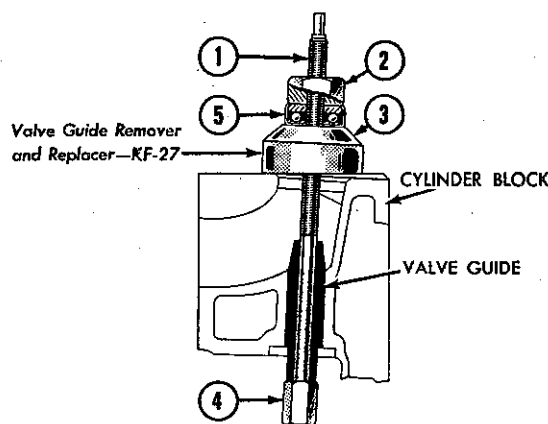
REMOVING VALVE GUIDE FROM CYLINDER BLOCK
